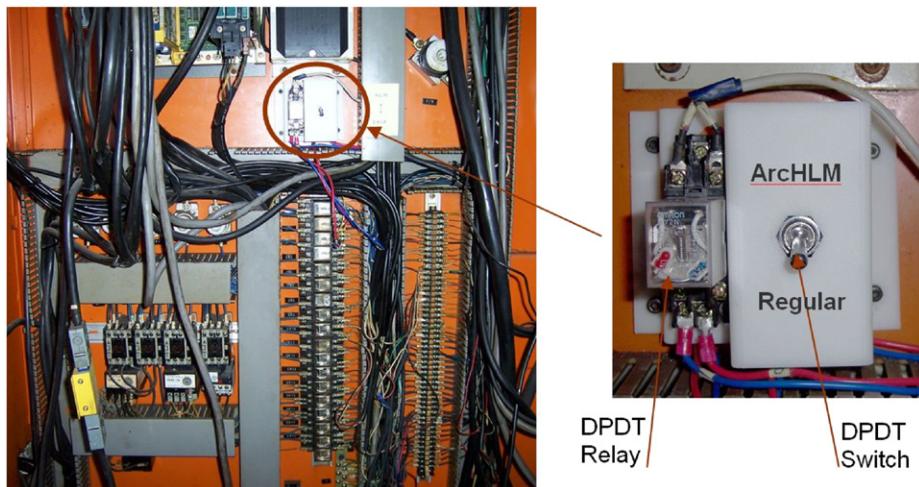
Frame for mounting DPDT switch and relay on CNC.
